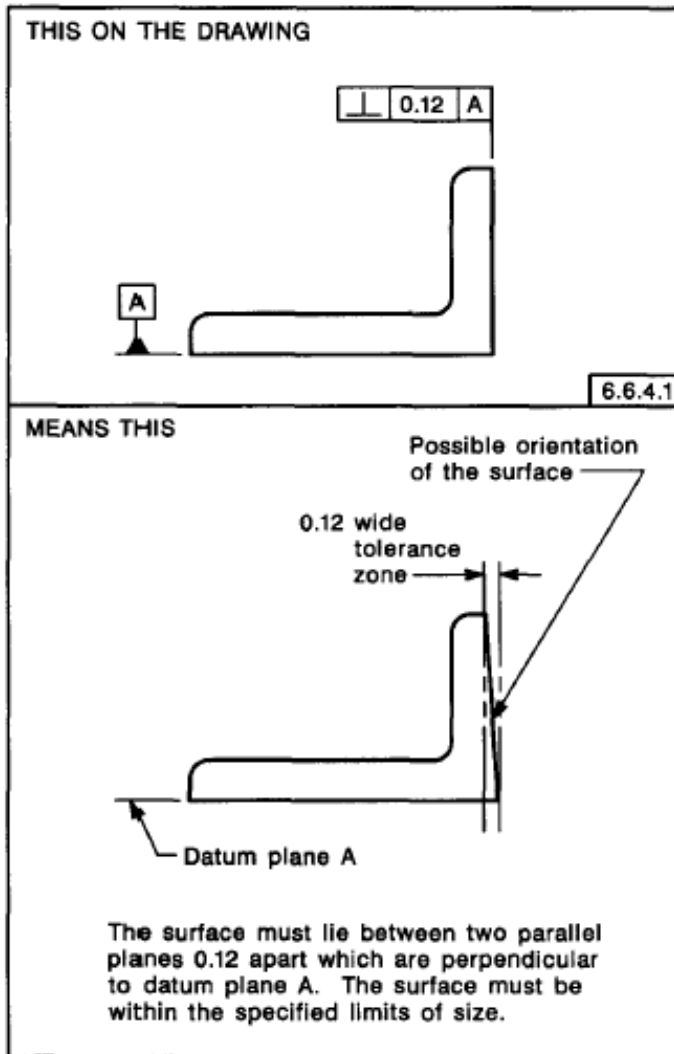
SPECIFYING PERPENDICULARITY FOR A PLANE SURFACE
